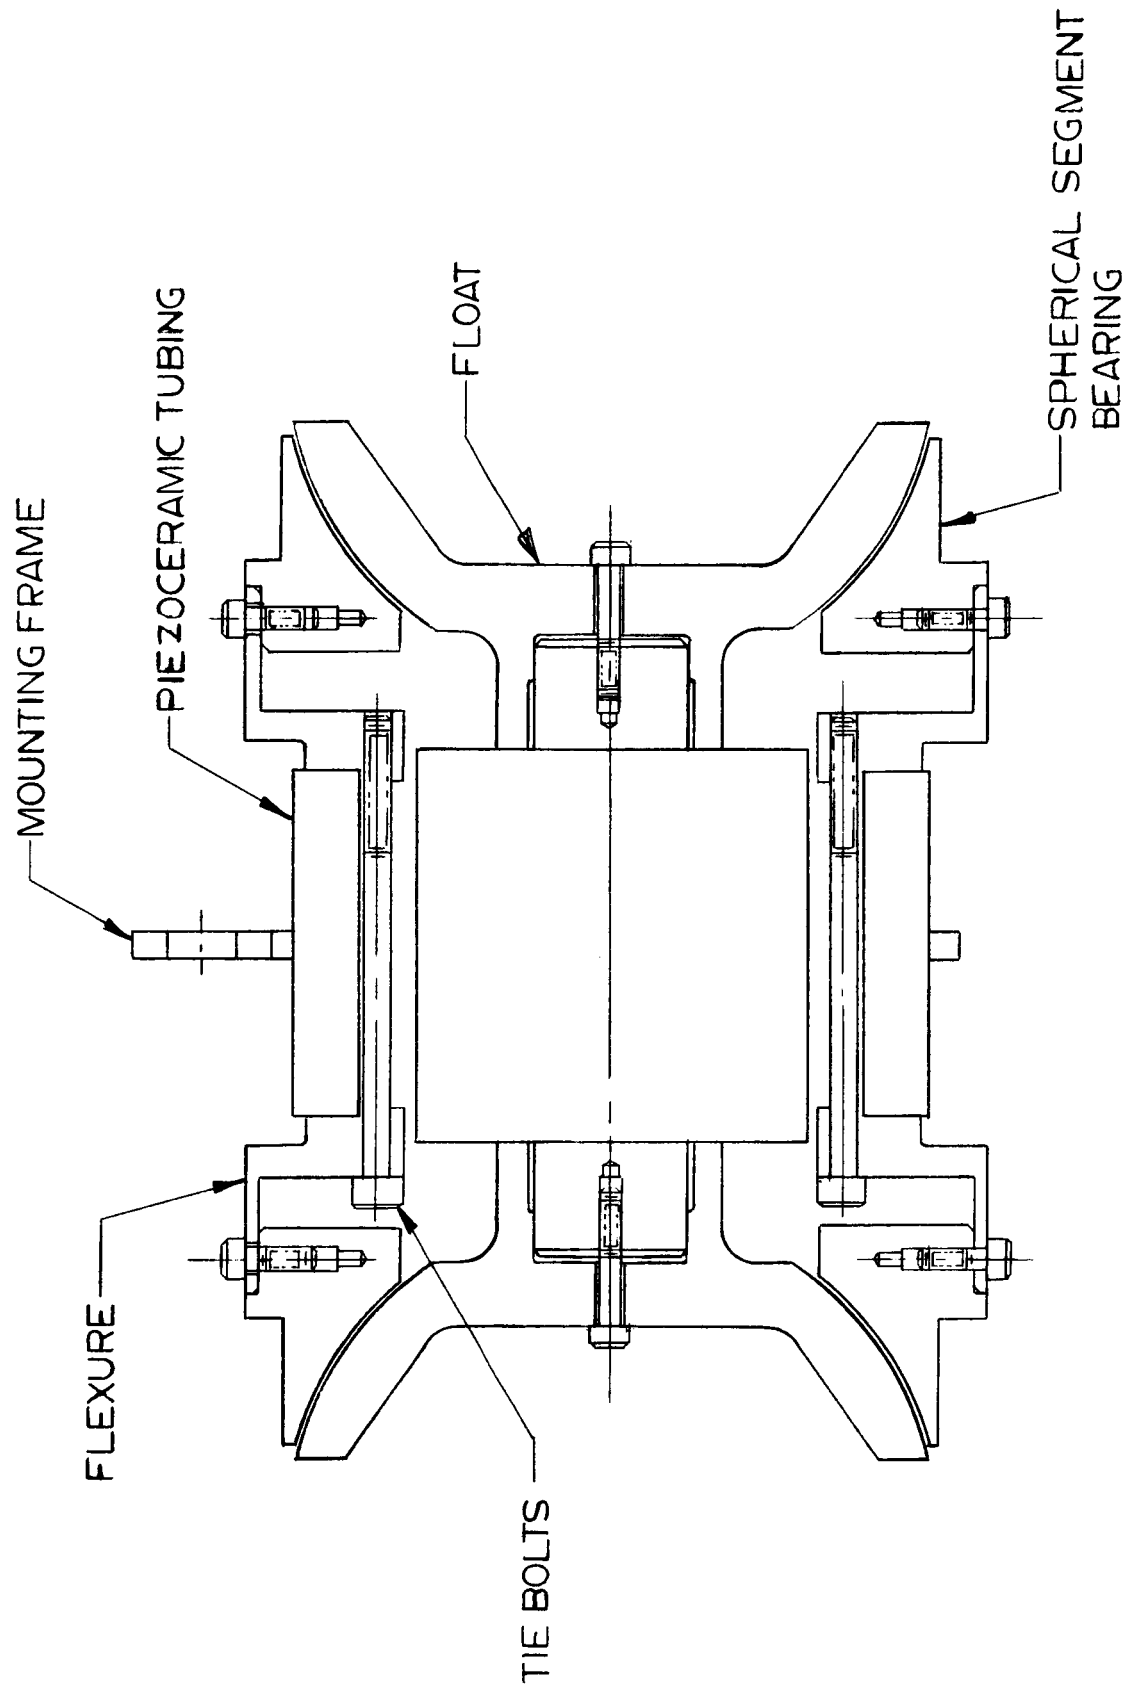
Cross Sectional View of Unmodified Spherical-Bearing,
